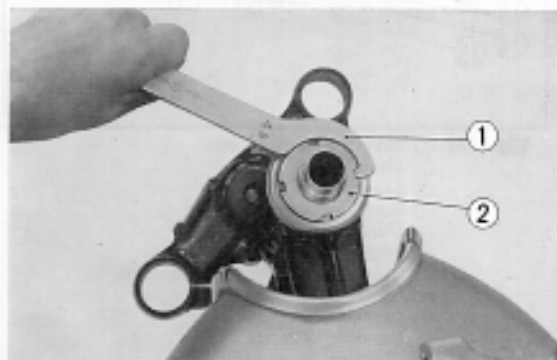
① Steering stem wrench ② Steering stem head nut
